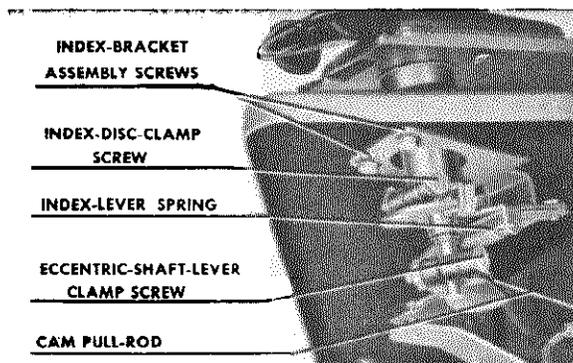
INDEX-BRACKET, INDEX-DISC, AND ECCENTRIC-SHAFT-LEVER ASSEMBLIES.
